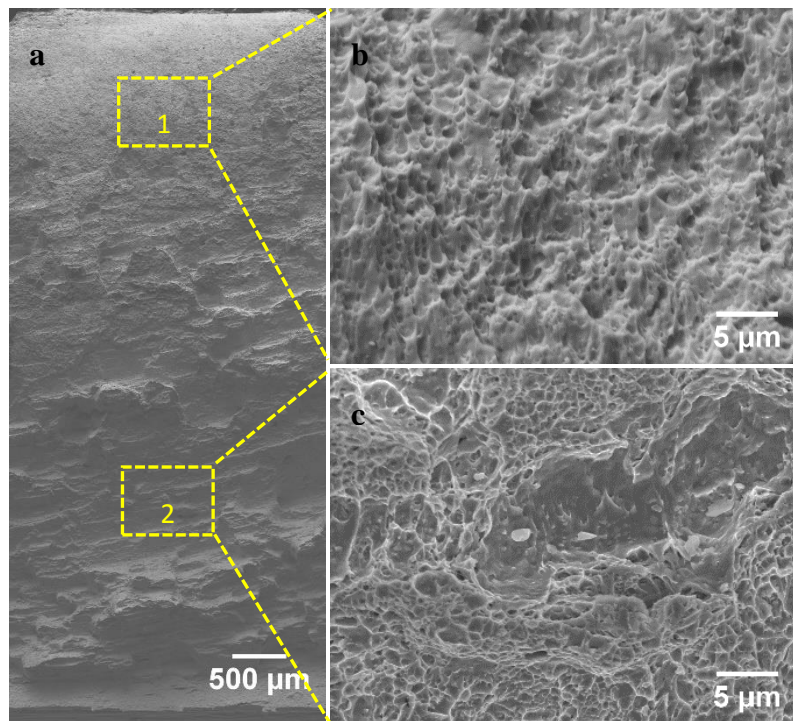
Representative fractographs of a hardfacing specimen in the as-tempered condition: (a) macro-fractograph, (b) higher magnification view of zone 1, and (c) higher magnification view of zone 2.
